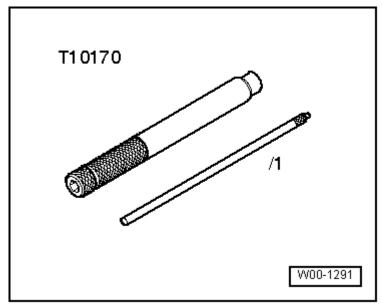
Identifying Dial Gauge Adapter -T10170- or -T10170 A-
